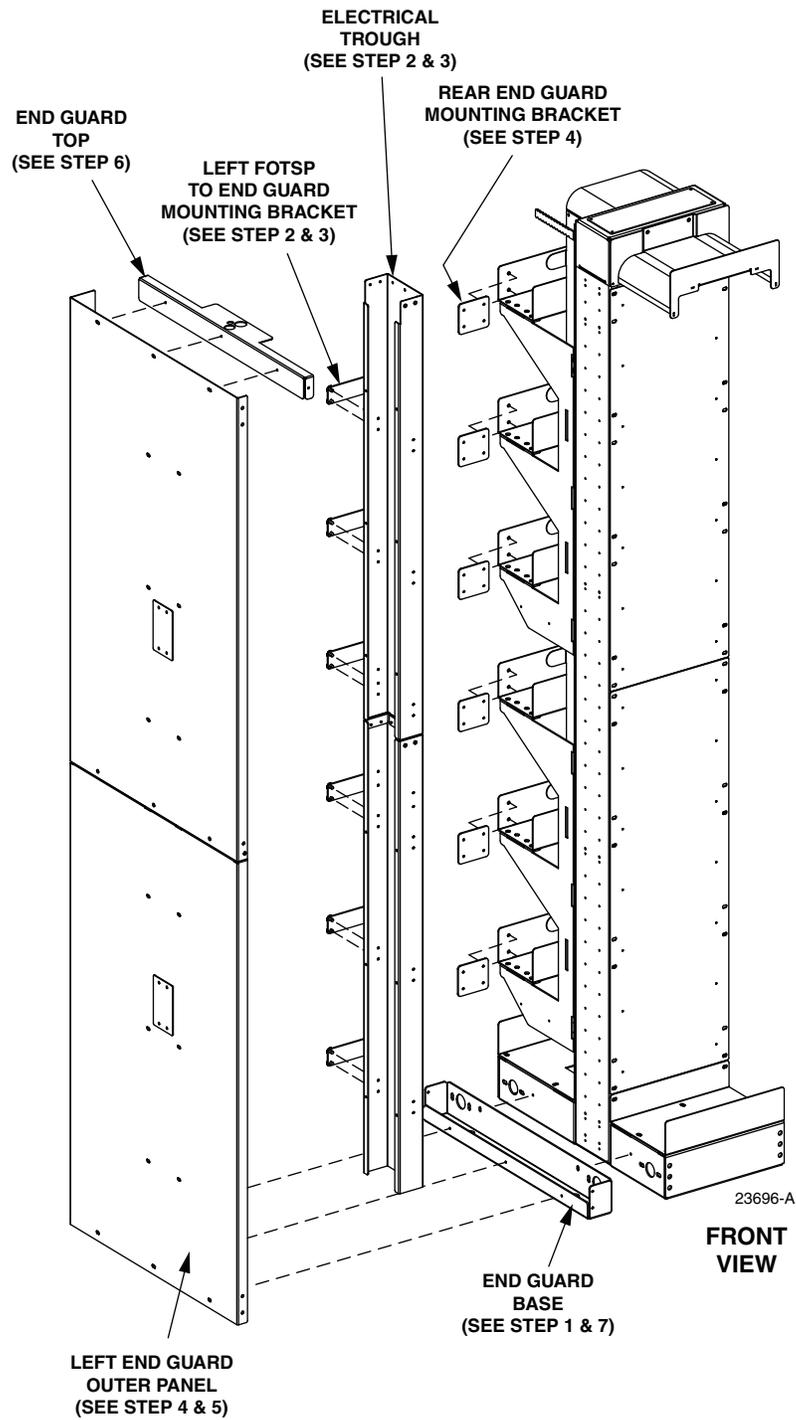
Left Side Installation on FOTSP Exploded View and Steps
